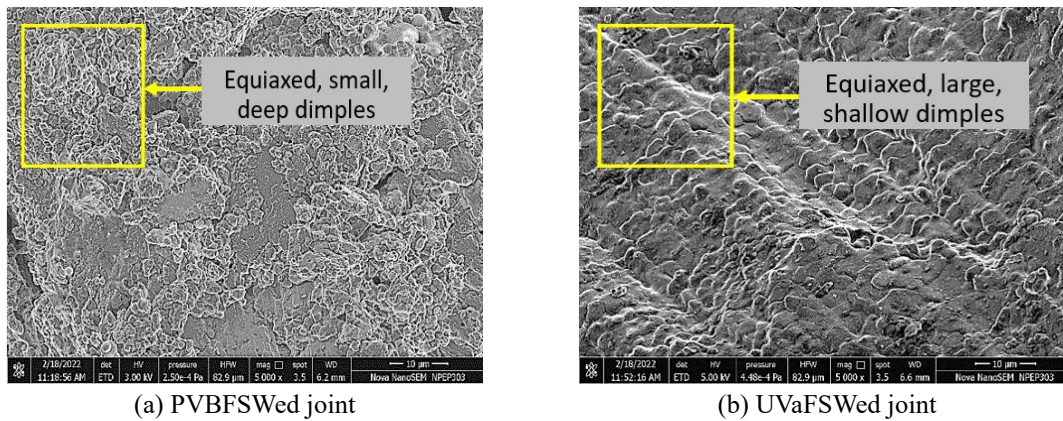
SEM images of fractured surface of AA7075-T651 joints
